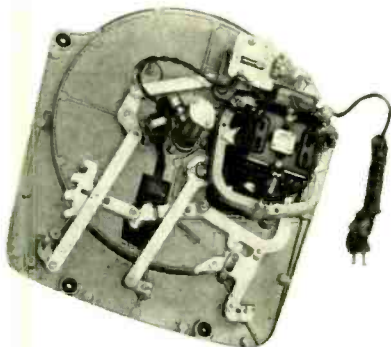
Underside view of Garrard unit shows interlocking controls and isolation between motor and base plate. Note grease cup on main shaft bearing.
